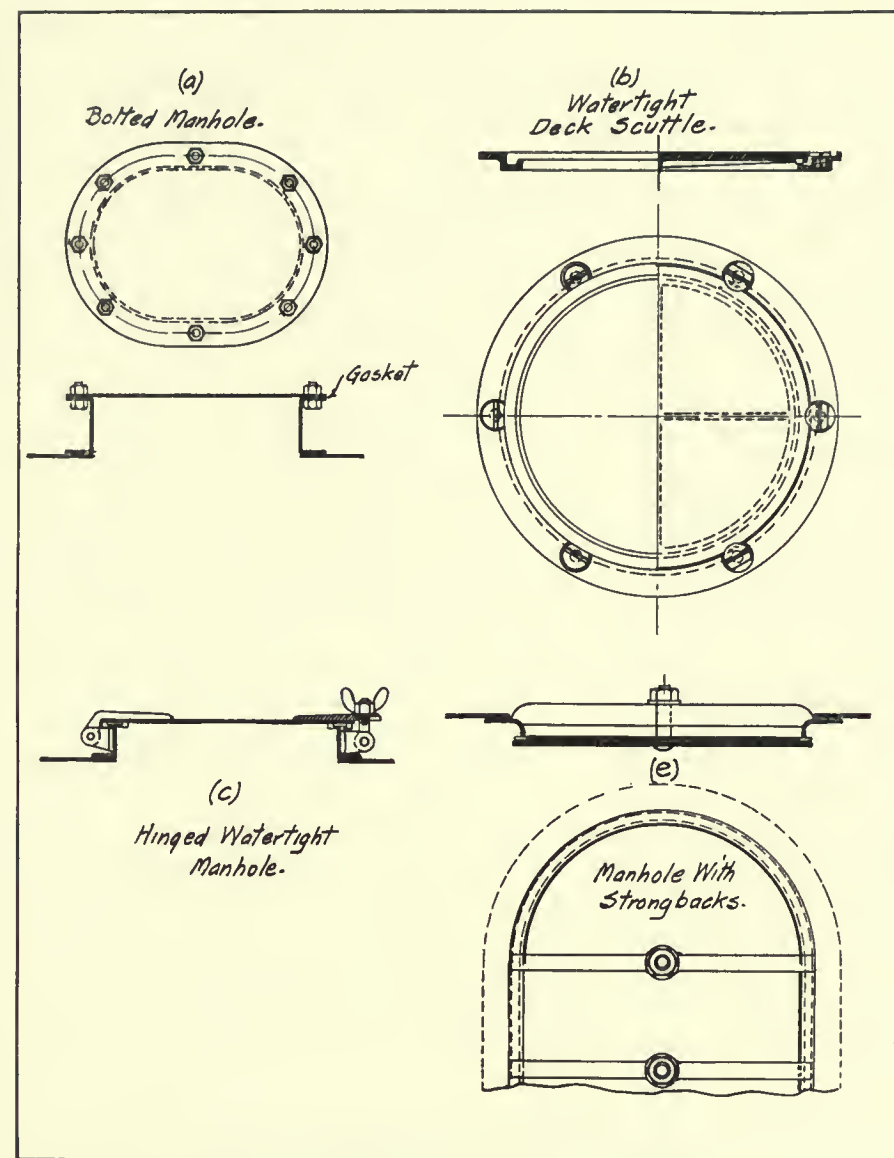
WATERTIGHT HATCHES AND MANHOLES
